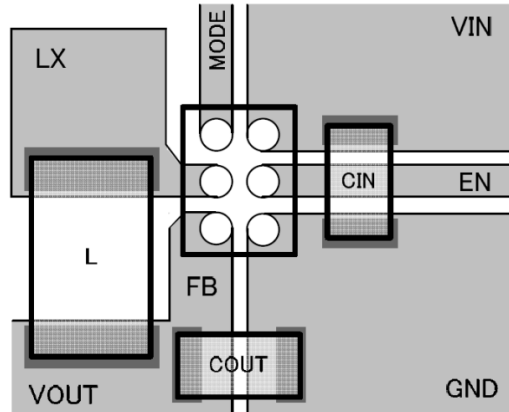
BU90004GWZ-E2EVK-101 PCB Layout
